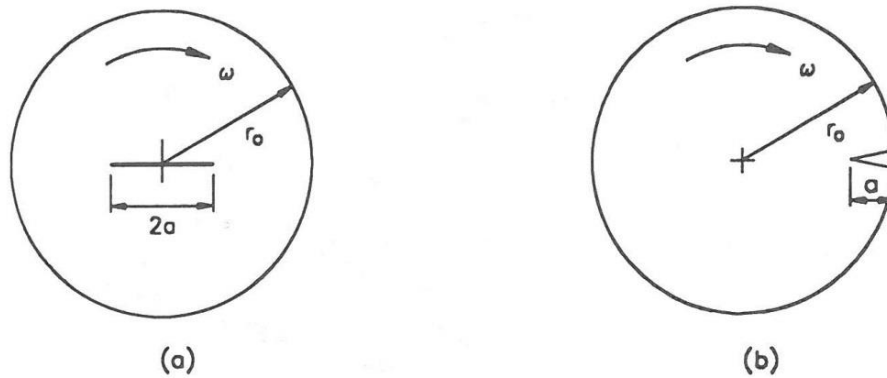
Cracked rotors: (a) disk with a central crack and (b) drum with a radial crack.
